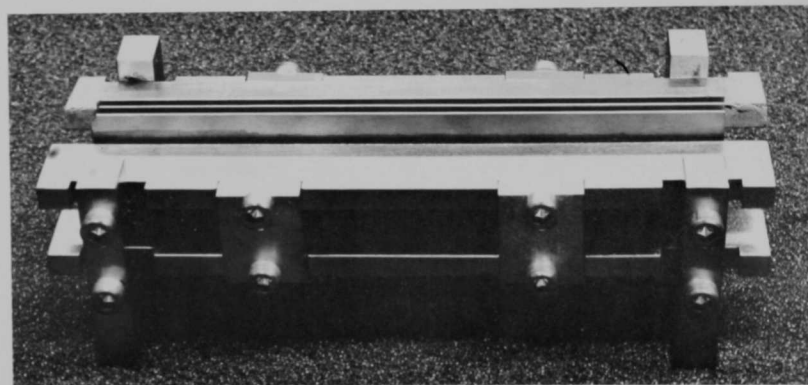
Brazing Fixture Used for Dummy Microassemblies
